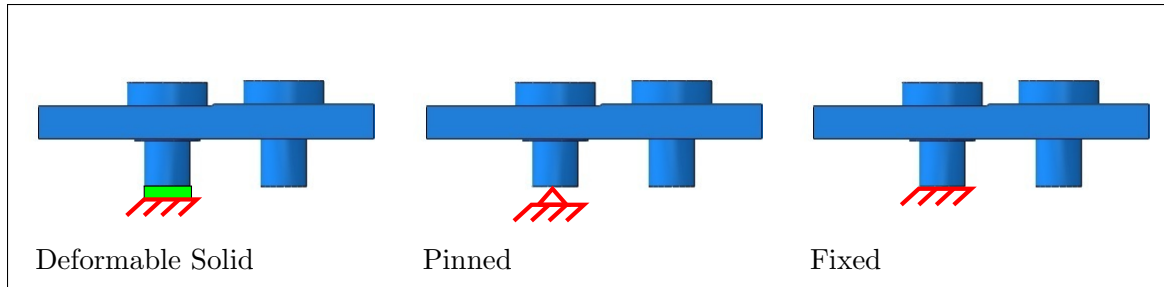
Modeling approaches for modeling existing adhesive joints
